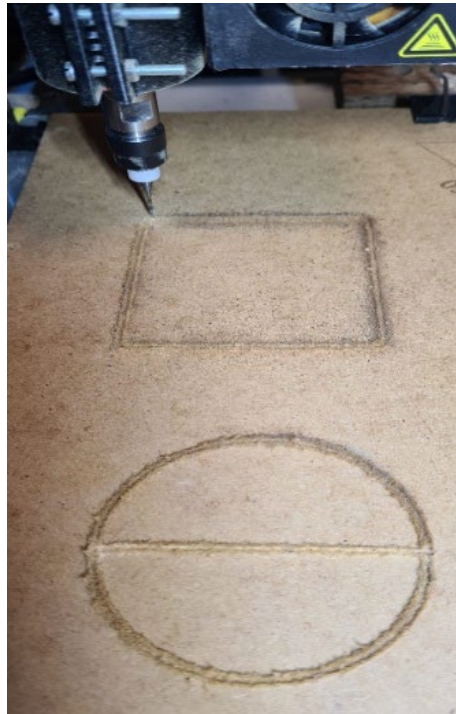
Quality of engraving with a  $\varnothing 1$ mm cutter
